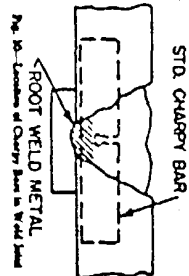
Location of Charpy Bar in Weld Joint
